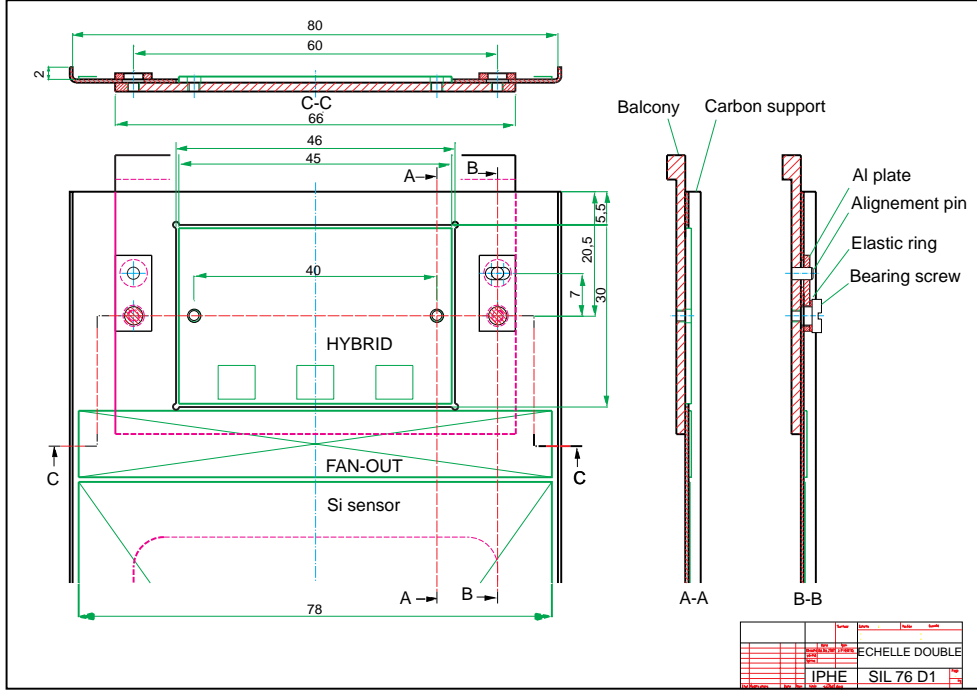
detailed drawing of the upper part of the Carbon support including the Al-Be balcony and the hybrid holding the Beetle chips.
